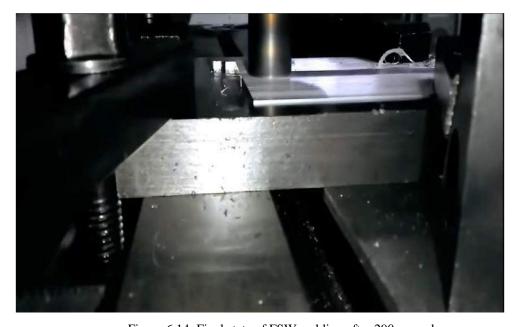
Final state of FSW welding after 290 seconds
